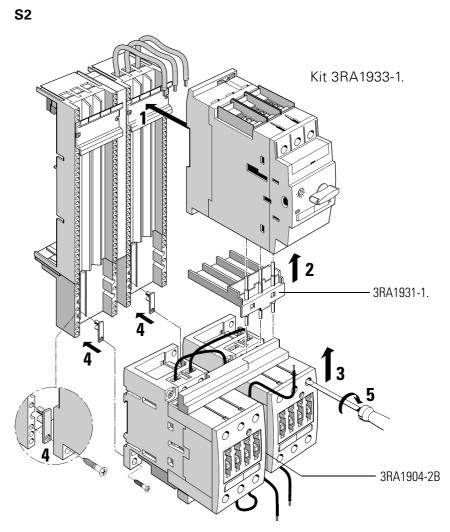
Self-assembly, busbars, reversing operation (frame size S2)
